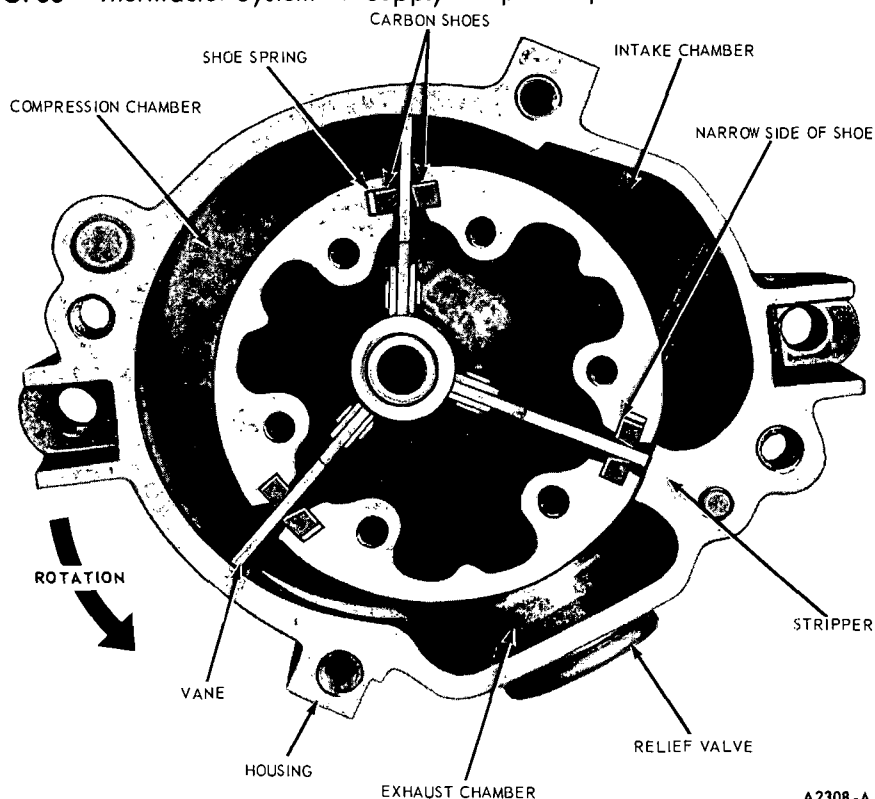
Vaness, Carbon Shoes and Springs Installed in Rotor
